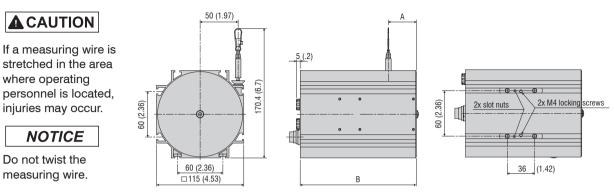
Dimensional drawing WDS- ... - P115 - U/I/P, measuring ranges 7500, 10000, 15000 mm, dimensions in mm (inches)
